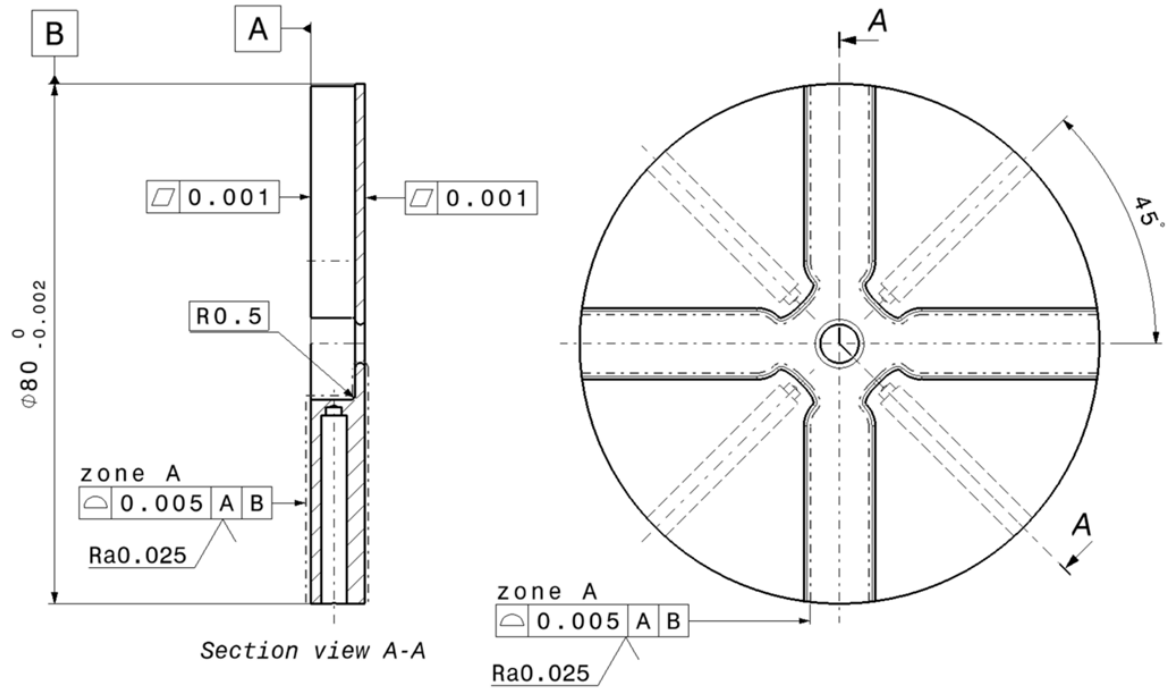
TD26 CC SiC disk drawing (Drawing by A. Solodko, courtesy of CERN).
